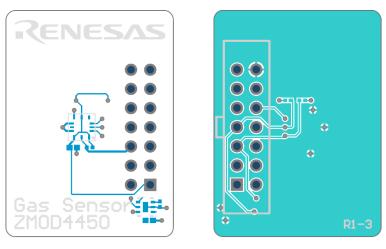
Sensor Board ZMOD445010 Layout with PIN Configuration
